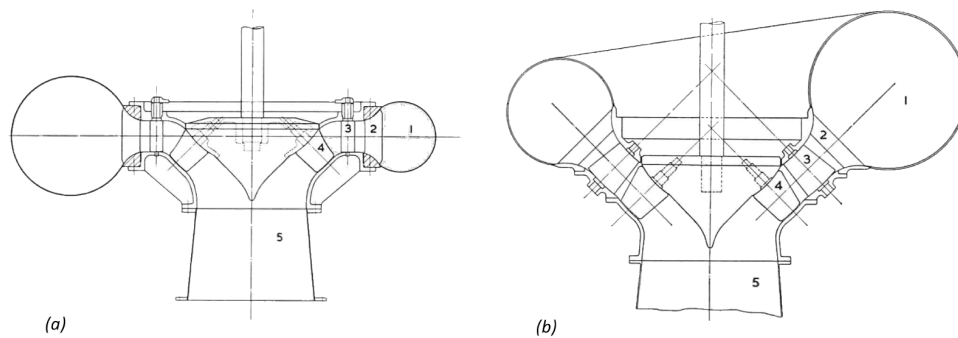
Shapes of Deriaz pump-turbine casing: (a) original shape; (b) second shape [Deriaz 1955]. 1) Case. 2) Stay vanes. 3) Adjustable guide vanes. 4) Blades. 5) Draft tube/suction pipe.
